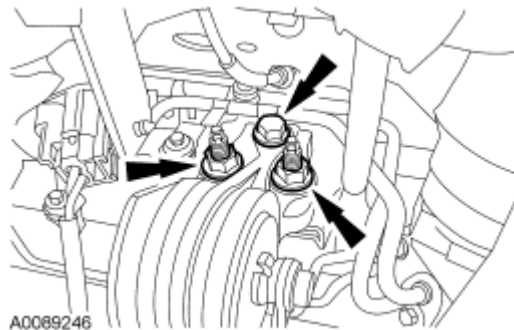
Locating Transaxle Support Insulator Bolt & Nuts
